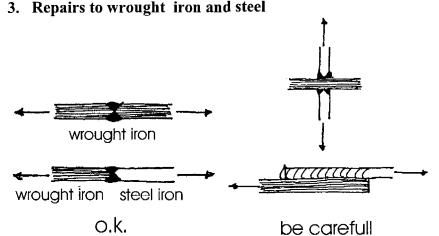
Welding wrought iron. A strong joint can be obtained in the direction of rolling, but care must be taken with joints at right angles to the rolling direction or joints under shear load.
